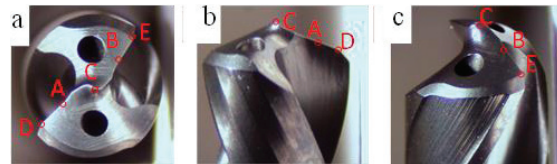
The drill: (a) top view; (b) side view; and (c) angled view of drill tip.
